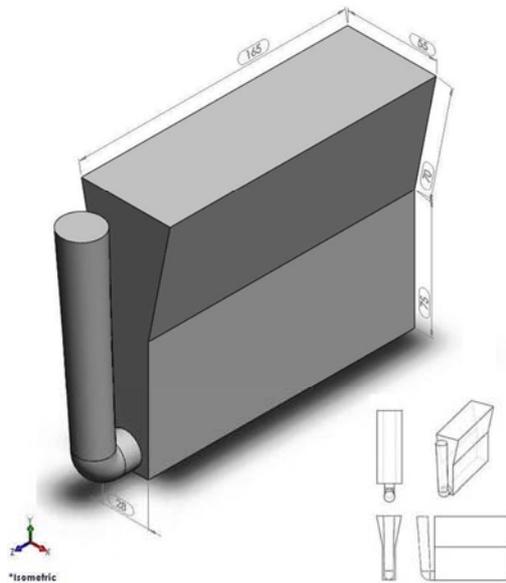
Schematic of the sample after casting in standard Y-block mold.
